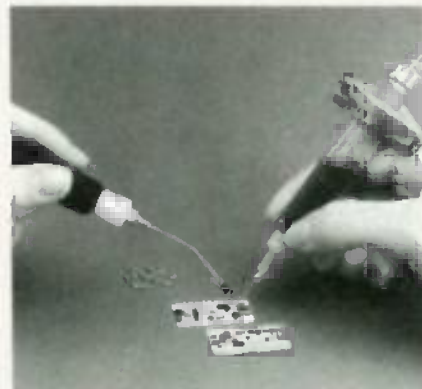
IT TAKES TWO HANDS to position an SMD device on a PC-board: one for the cream dispenser, the other for the vacuum holder.
